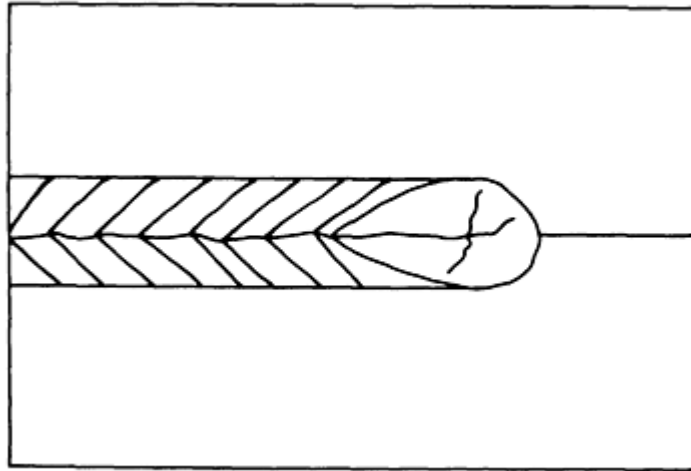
HOT CRACK AND CRATER CRACKS IN WELD BEAD
